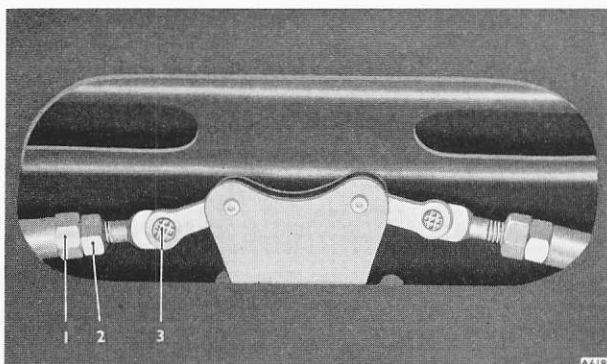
Cable adjusters for the luggage boot lock — early S1 cars
